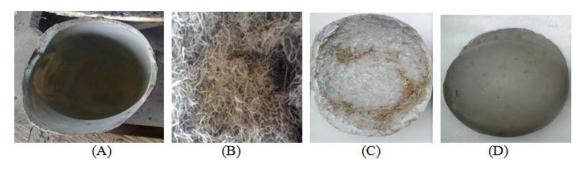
Helmet production processes (A) Helmet open mould; (B) Treated chopped fibre; (C) Internal surface of helmet pattern; (D) External surface of helmet pattern
